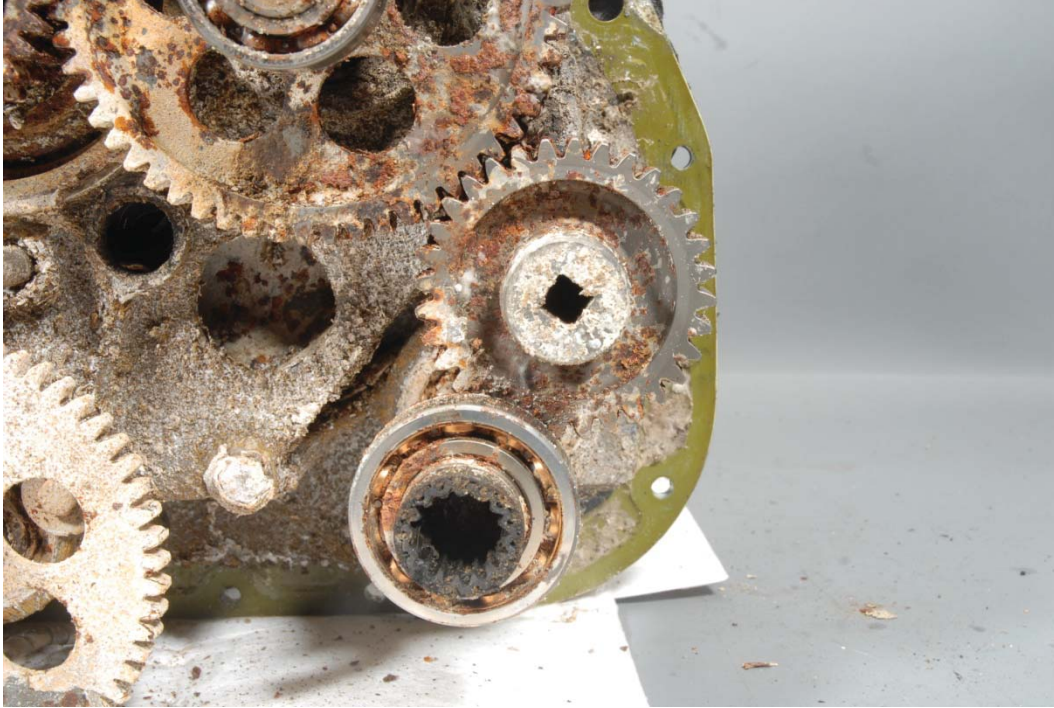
P-79001C, Propeller Governor Drive Gear Assembly
